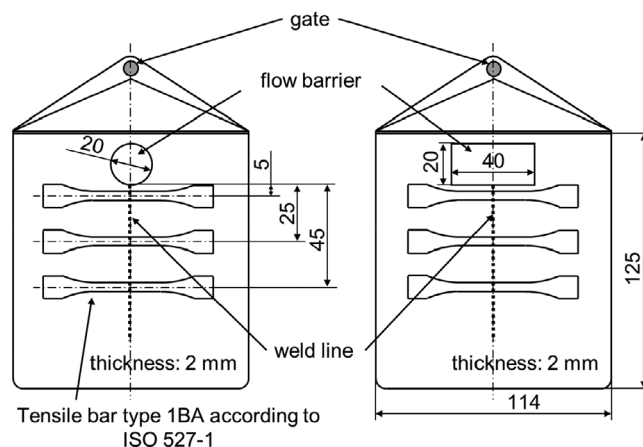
Injection-molded PS and PMMA plates for the generation of test specimens with weld lines and position of the test specimens. PMMA, polymethyl methacrylate
